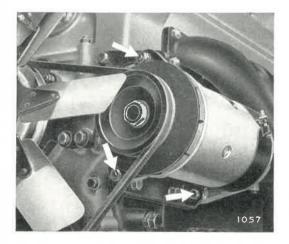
To adjust the fan belt tension slacken the three dynamo mounting bolts and move the dynamo into the desired position.
